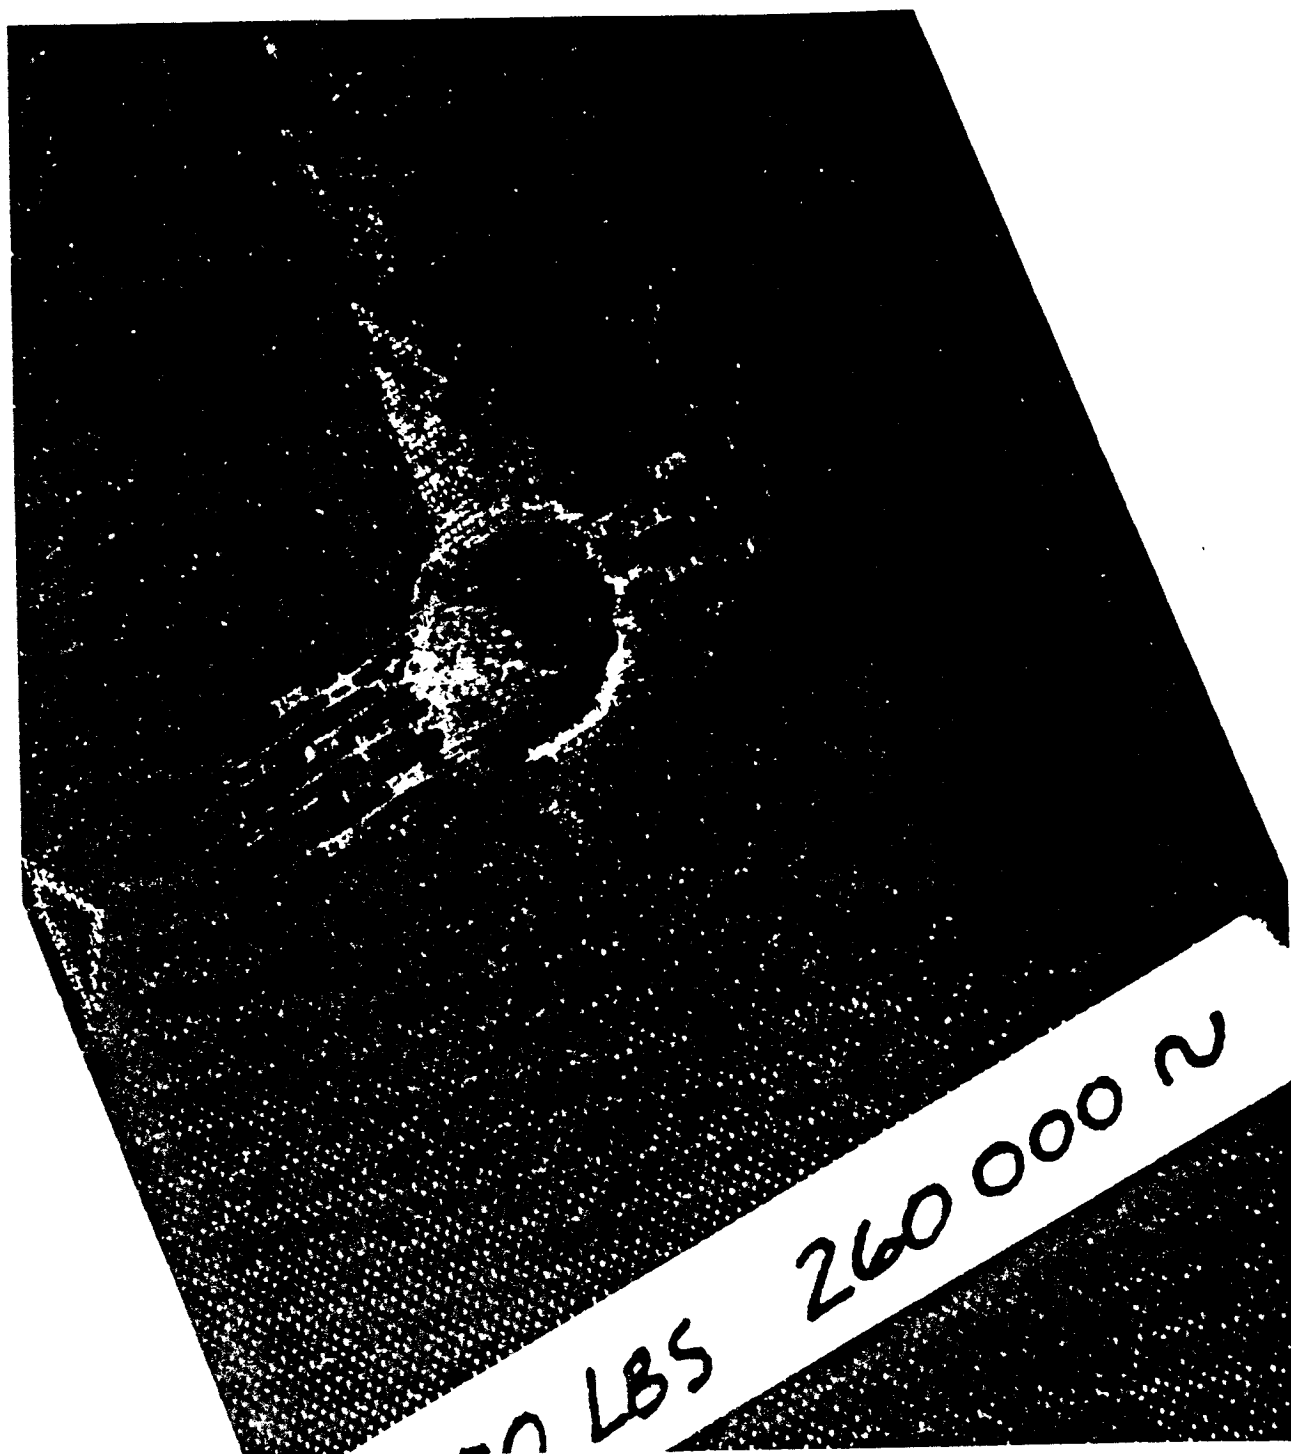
CLOSE-UP VIEW SHOWING FATIGUE DAMAGE IN IMPACT-DAMAGED SPECIMEN
